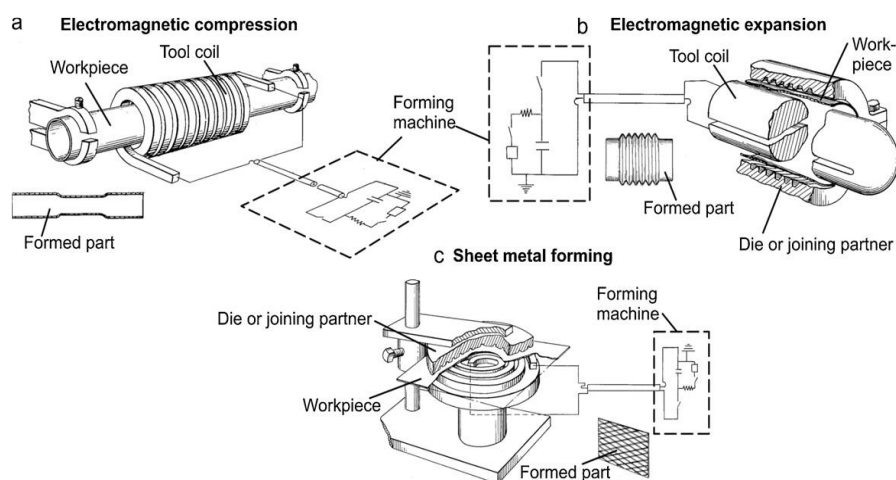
Different types of EMF setup [25], (a) tube compression, (b) tube expansion, (c) bulging of flat sheets
